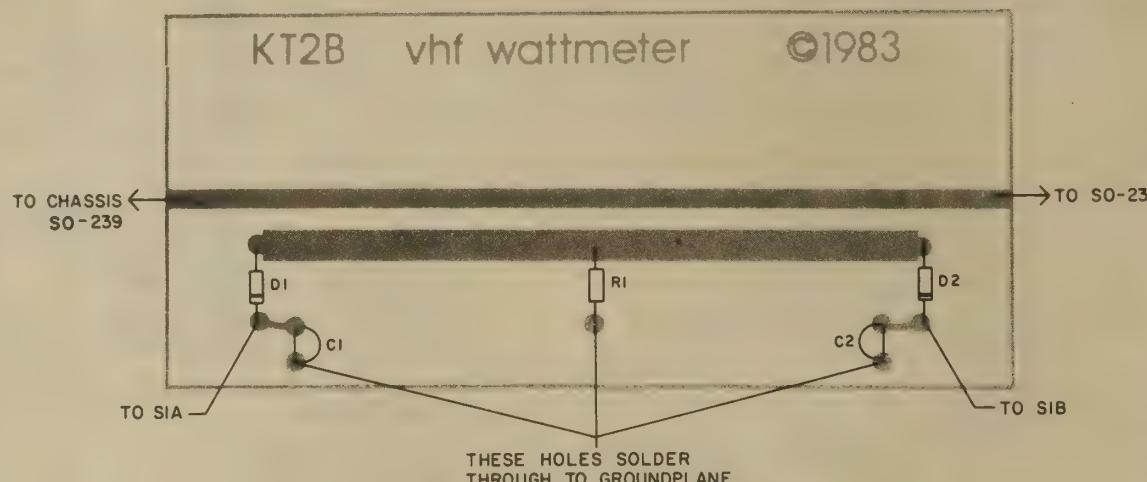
PC board overlay for parts (except where indicated, all parts are soldered to the top side).
